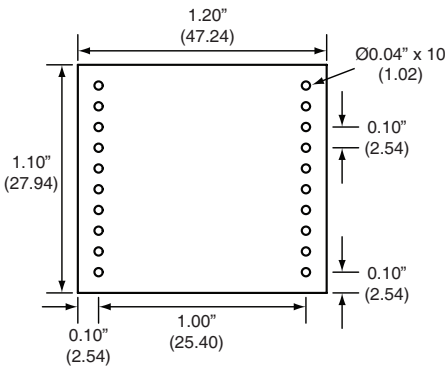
EVM-GPS-R4 PCB Layout Dimensions
